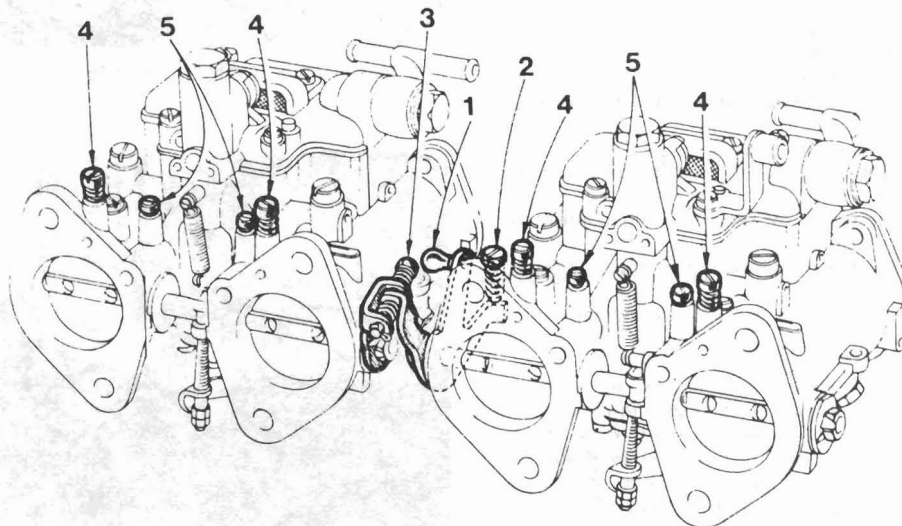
Carburettor adjustment screws (Sec 8)
